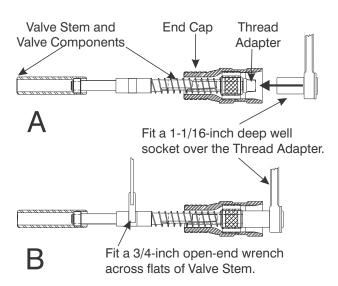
Position Wrenches on Thread Adapter and Valve Stem.
